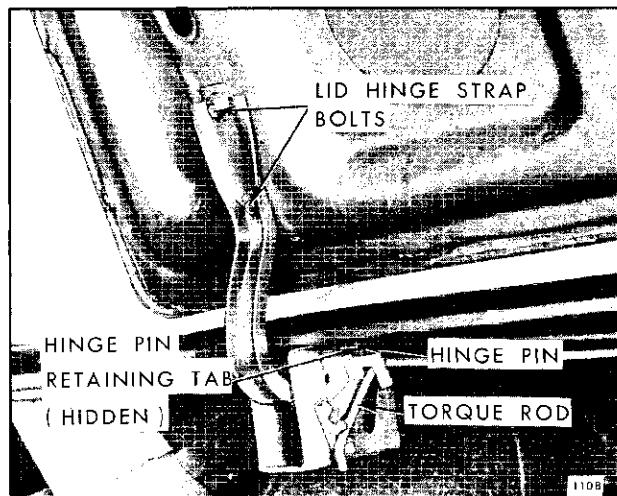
Rear Compartment Torque Rod Adjusting Provisions — Typical "B and C" Styles
